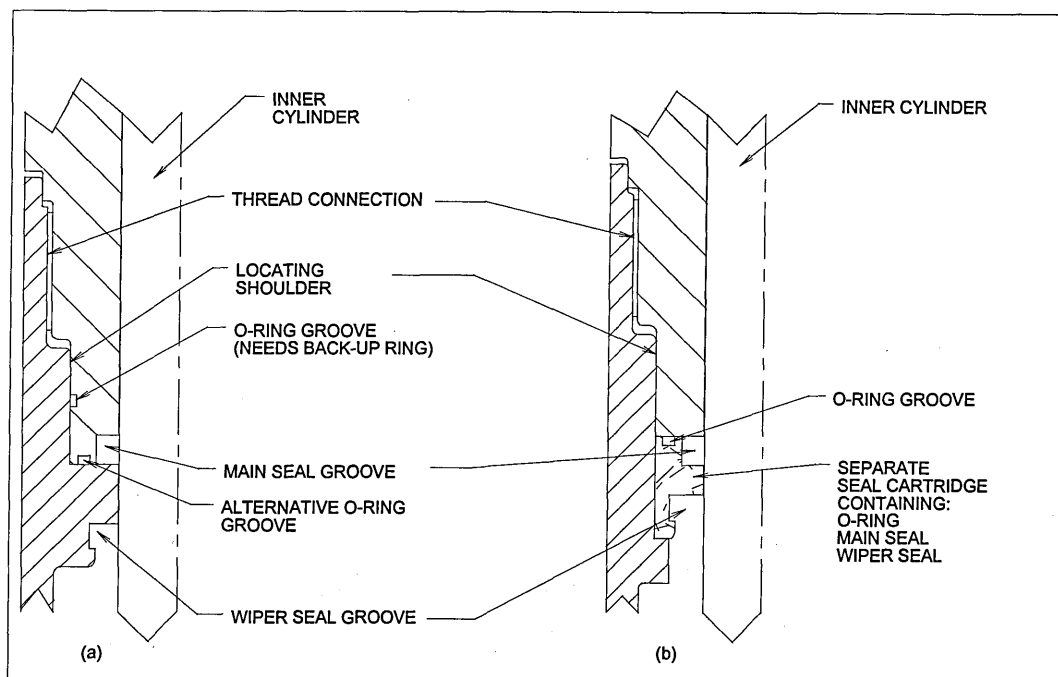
ALTERNATIVE METHODS OF ASSEMBLING AND SEALING THE OUTER CYLINDER, AND INCORPORATING THE MAIN SEALS
